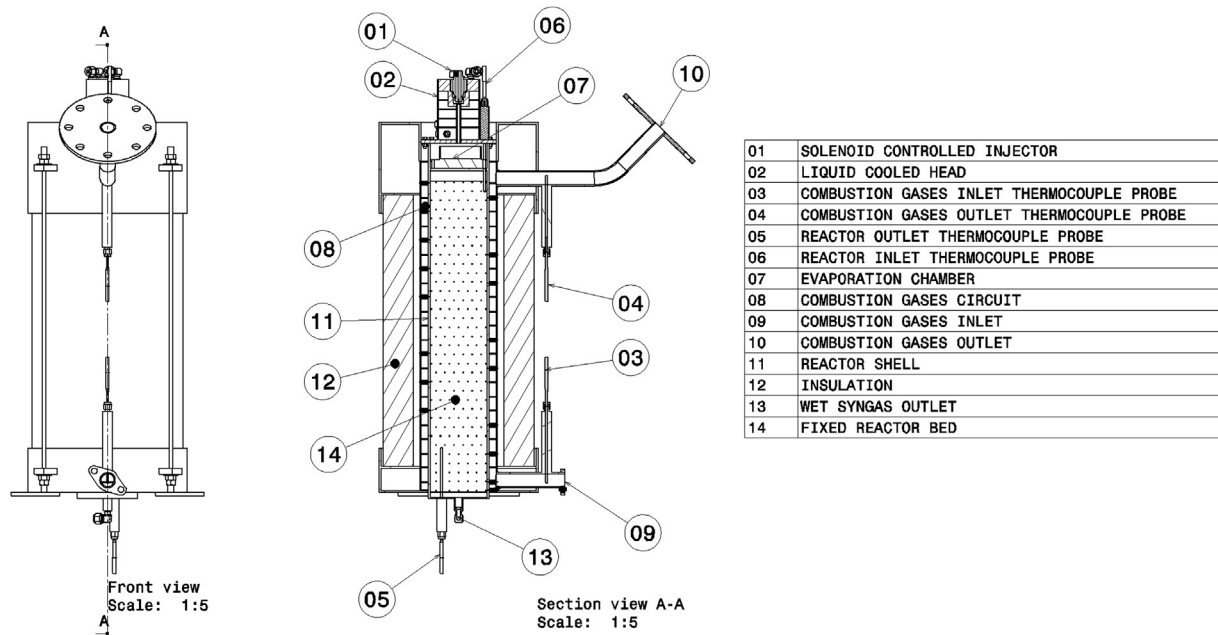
Assembly design of the heat recovery steam reforming reactor.
